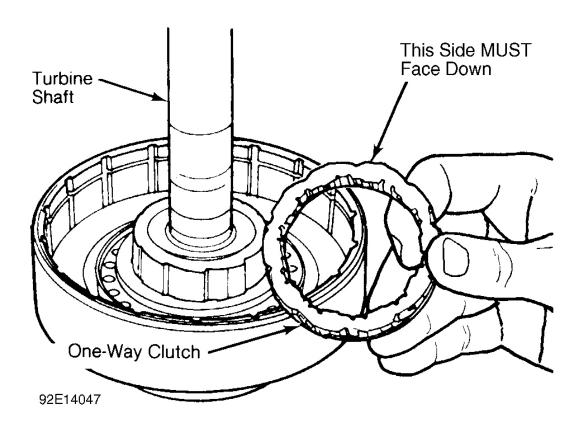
Installing One-Way Clutch Courtesy of FORD MOTOR CO.
